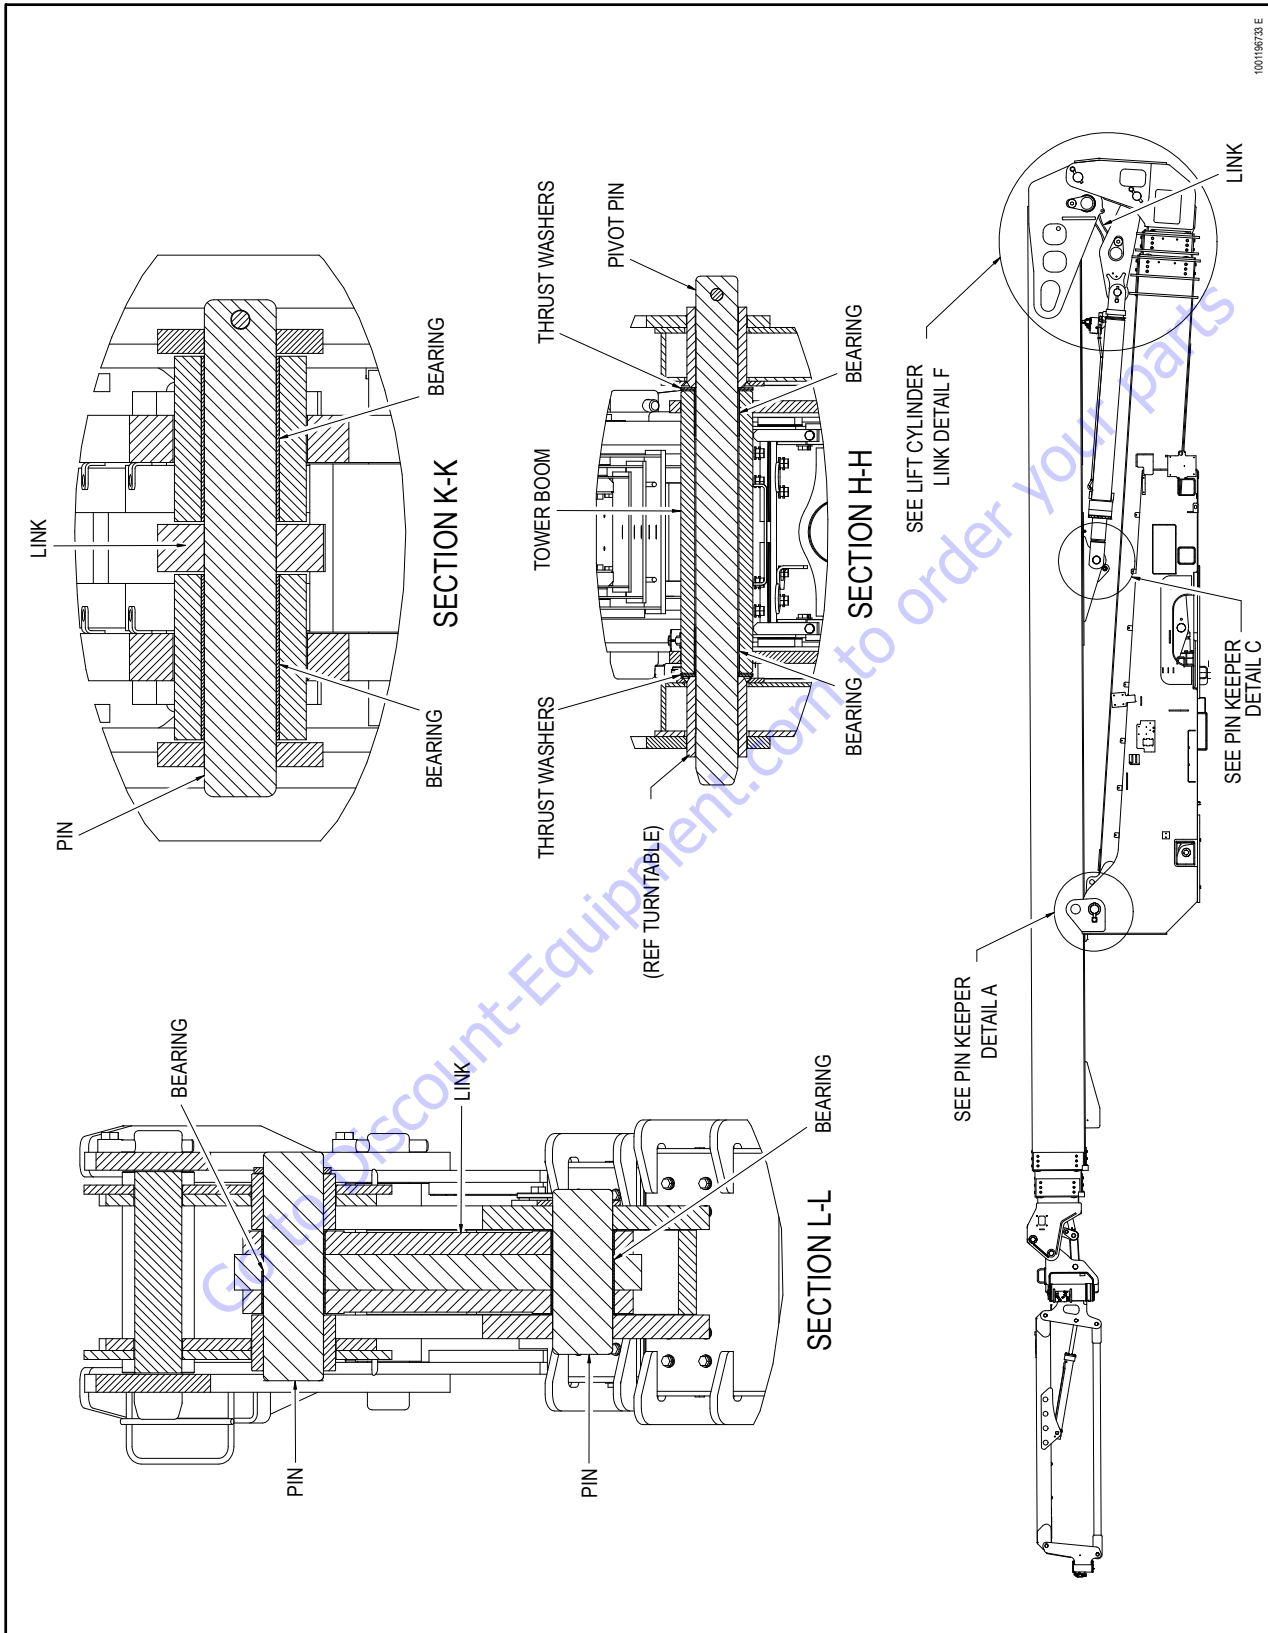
Boom and Cylinders Installation - Sheet 3 of 4
